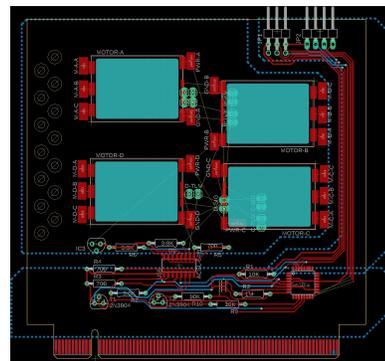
An example schematic of a custom PCB from the first stage of development, designed to be plugged into the edge connectors of the main bus.
